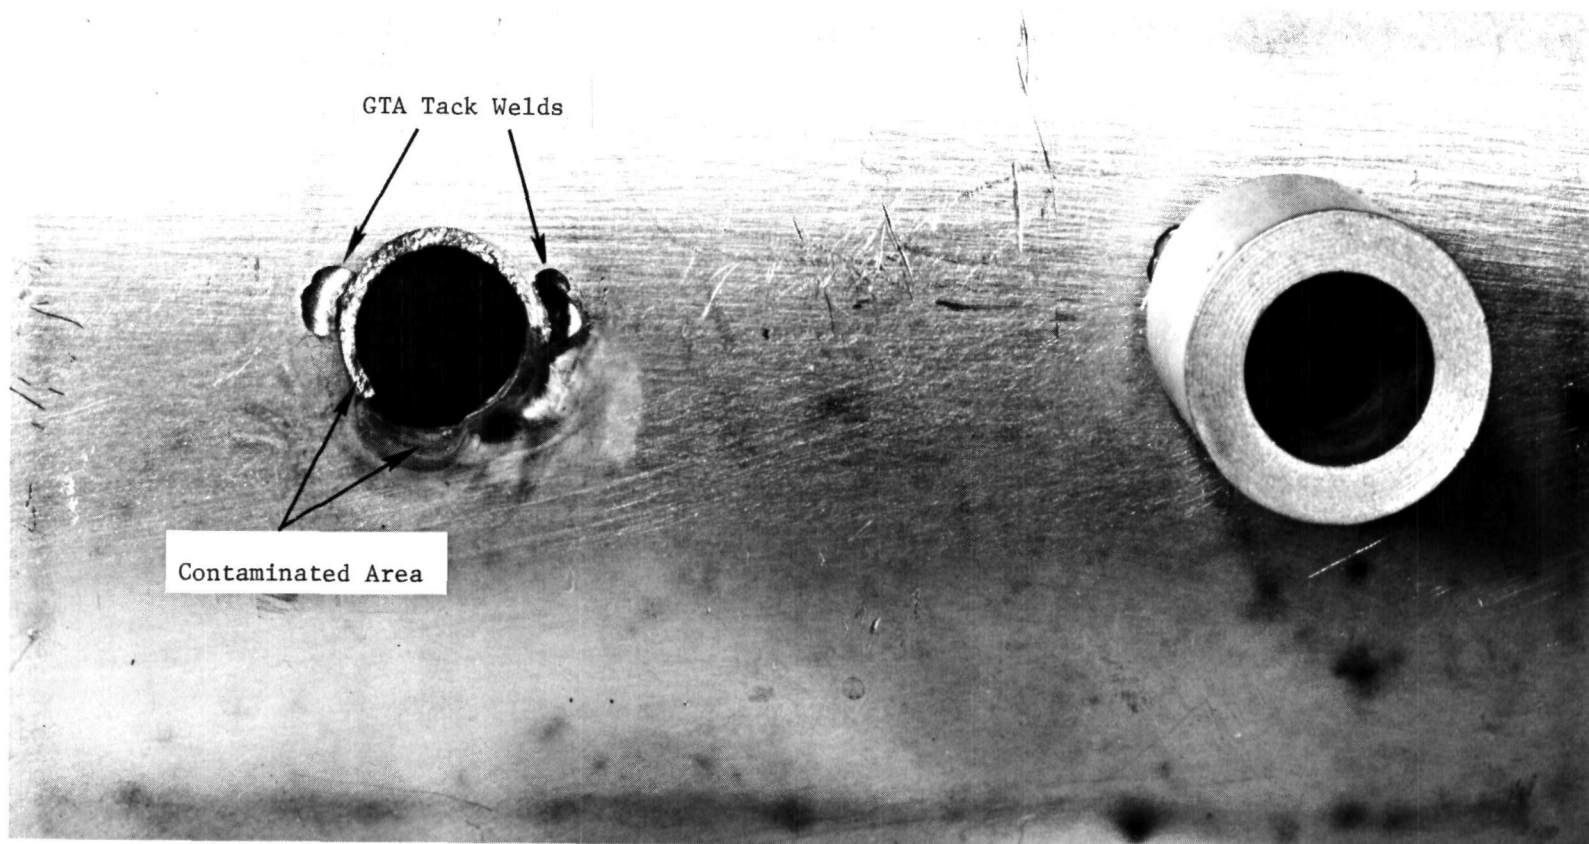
Outlet Manifold Illustrating Boss Location Where Welding Torch Failure Occurred. (P69-4-53G)
